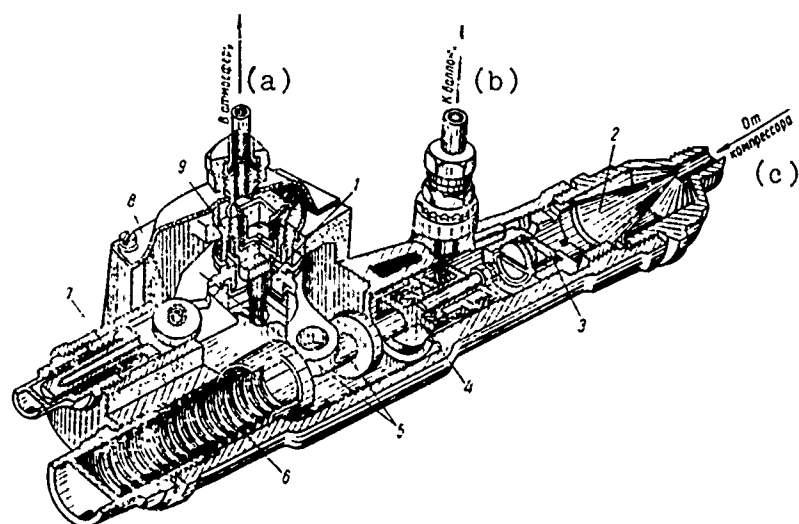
AD-50 automatic pressure control: 1 - needle; 2 - filter; 3 - check valve; 4 - piston; 5 - lever of needle; 6 - reducing spring; 7 - stop; 8 - roller of stop; 9 - nut of needle.
